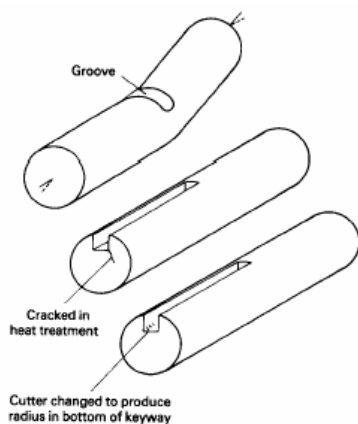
(c) Grooves will cause a shaft to warp in heat treating (top). A keyway with sharp corners often initiates cracks in quenching (center). The keyway crack problem is avoided with a radius (bottom). Source: Ref 23
